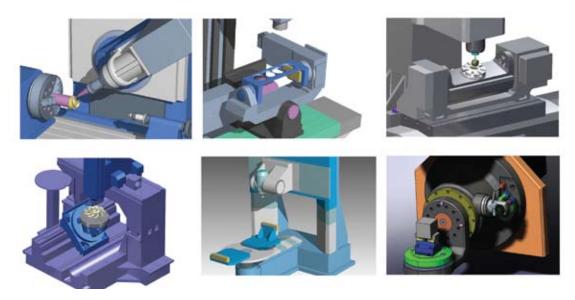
Typical arrangements of multiaxis CNC machines.
